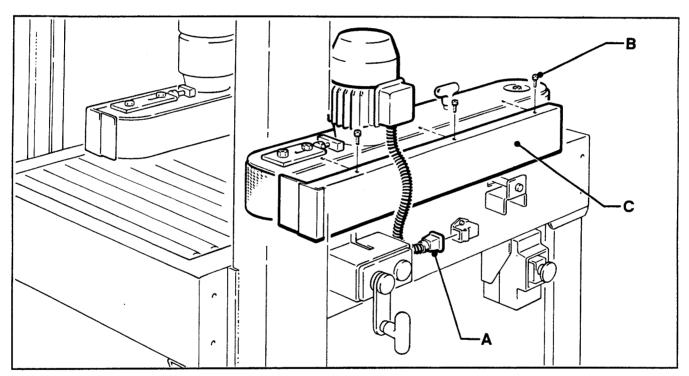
A - Box Drive Belt - Case Sealer Left Side View Infeed End
